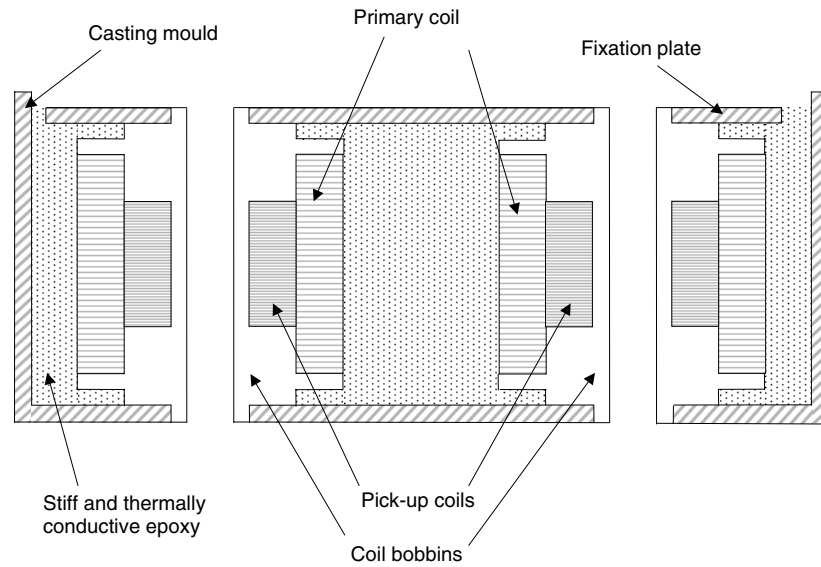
The complete assembly of the cast coils in the casting mould. After casting, the coil assembly becomes a compact block of a stiff and thermally conductive material.
